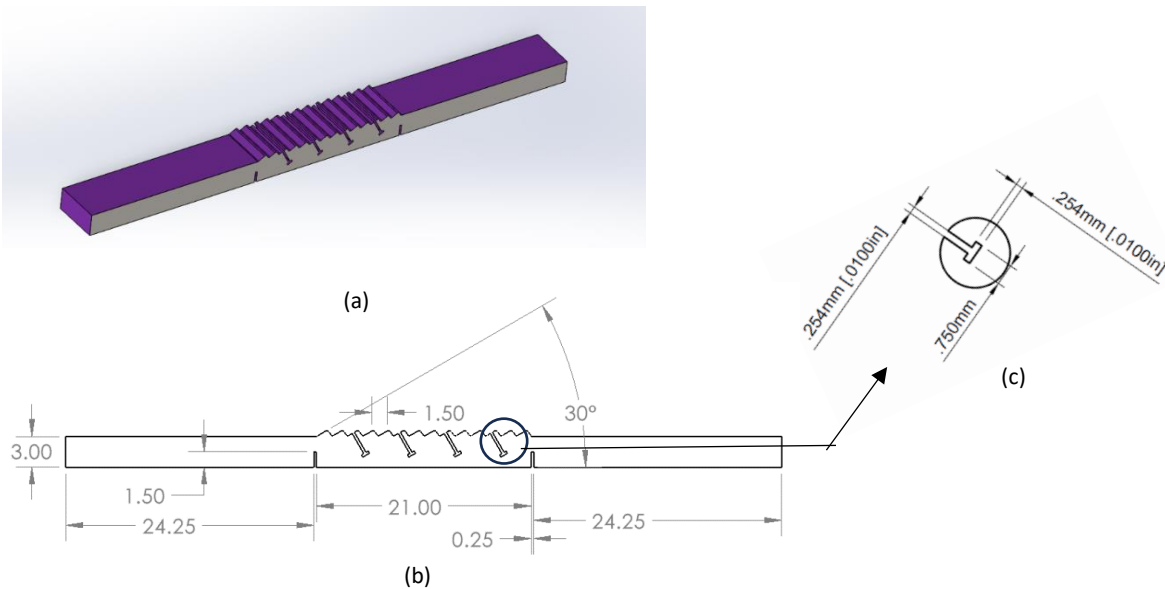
Fabricated ratchet test section (a) Isometric view (b) Dimensions of the test section (c) Dimensions of the nucleation site. All dimensions in mm
